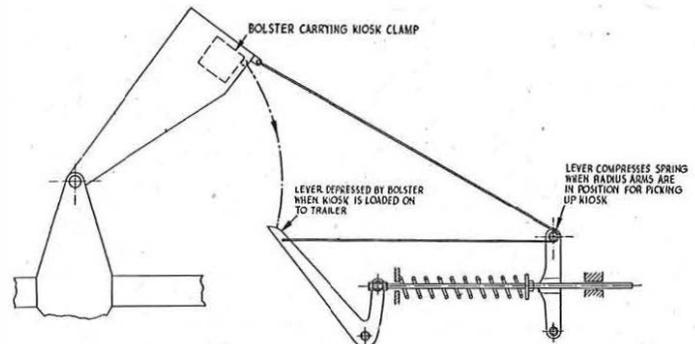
SCHEMATIC DIAGRAM OF ASSISTOR GEAR.
